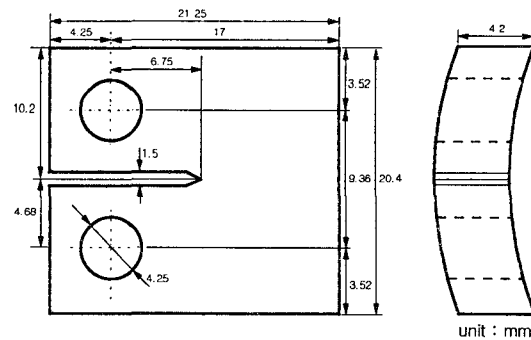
Dimension of 17 mm thick curved compact tension specimen
